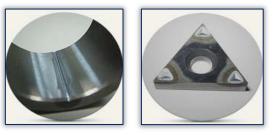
Examples of machined parts with ECM made from ceramic-metal hard alloys (WC-Co, WC-TiC-Co) [9]
